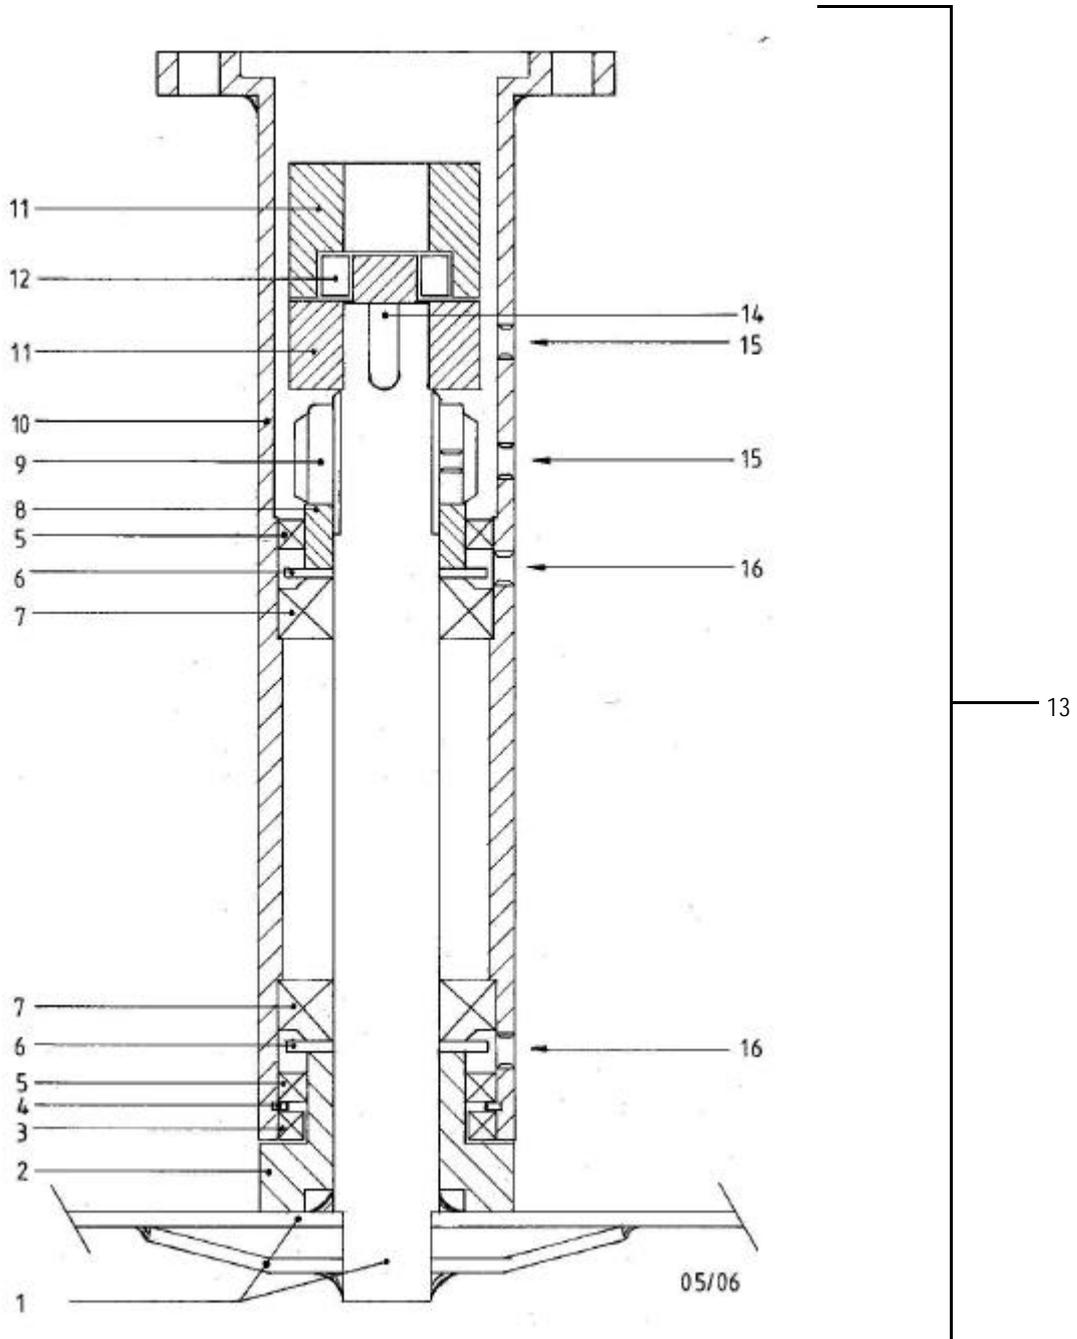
CUB 4000 & 6000 Spinner Assembly
